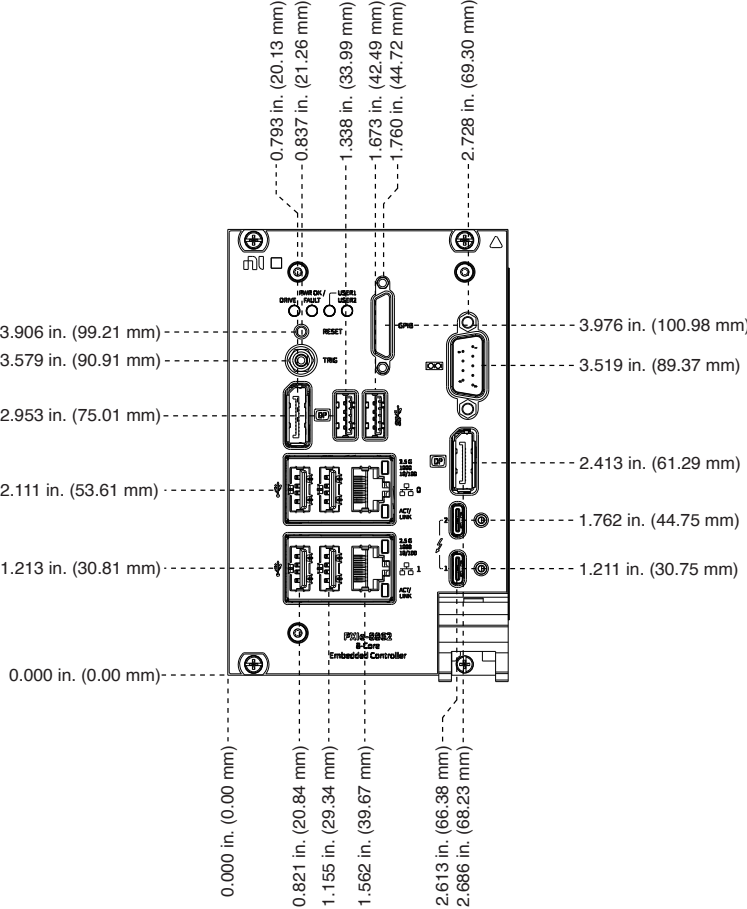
PXIe-8862 Without GPIB Front Panel Layout and Dimensions
